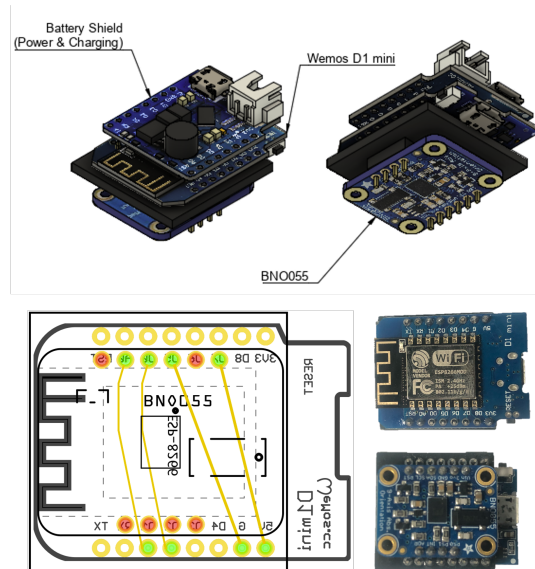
The PCB layout and CAD of the motion tracking device.
